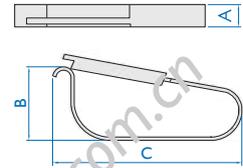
¹/₃ (33.78) and 2³/₄ (69.85) Flanges
